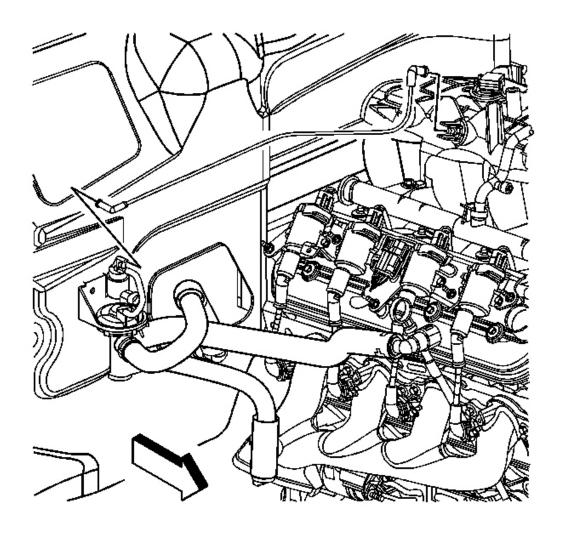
View Of Heater Water Shutoff Valve Actuator Inlet Hose Courtesy of GENERAL MOTORS CORP.
